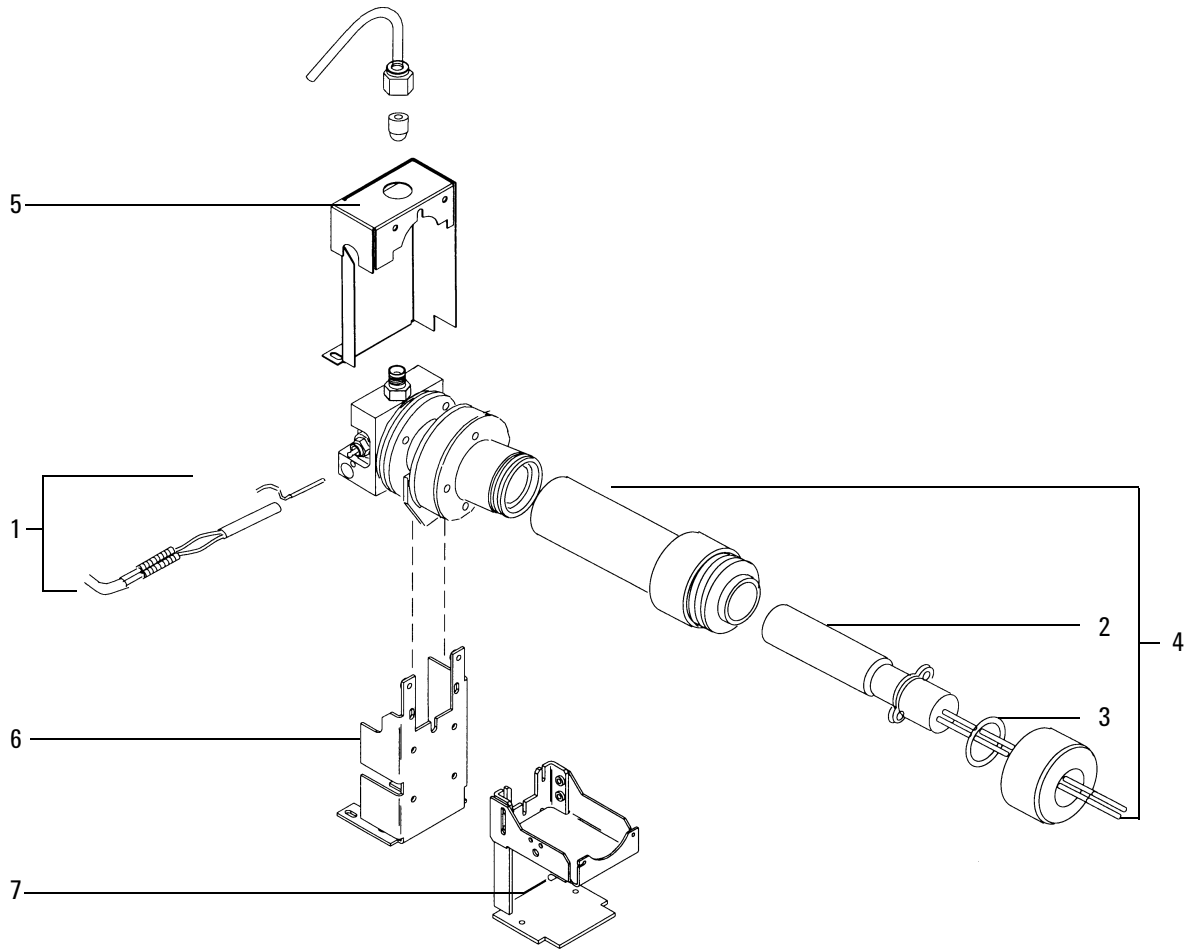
Exploded diagram of the PMT and bracket assemblies
